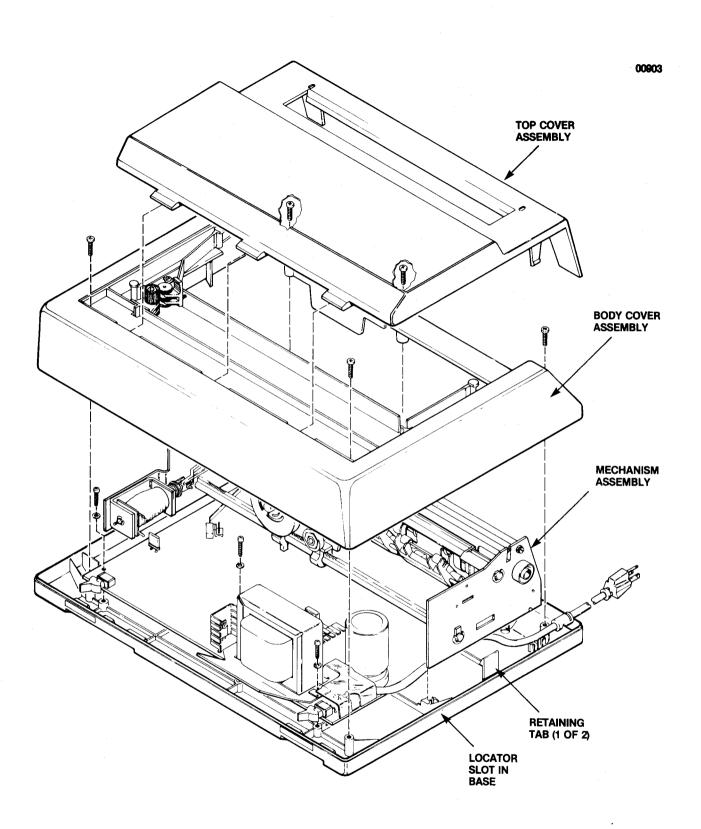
MECHANISM ASSEMBLY REPLACEMENT
